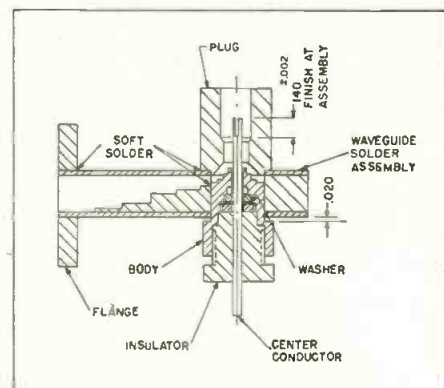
Assembly drawing of WR-51 crystal mount, Ridge waveguide design is employed, with single ridge to transform to coaxial line impedance
